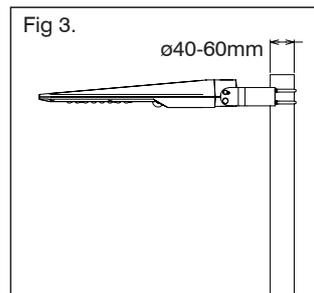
Tighten screws to fix lamp onto the pole (size ø40-60mm).
